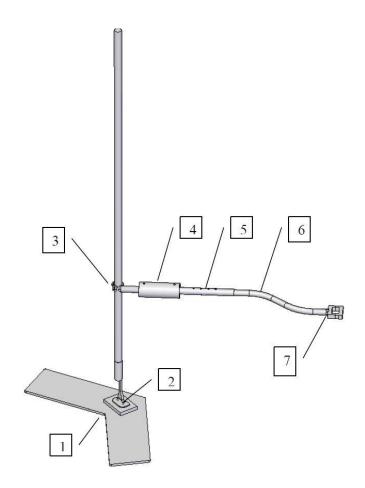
Detailed CAD drawing of the Swivel Plow illustrating the key features.
